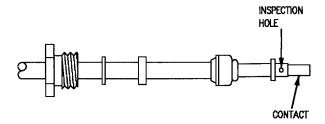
M25516/19-04-14 Coax Connector Repair (Sheet 1)
